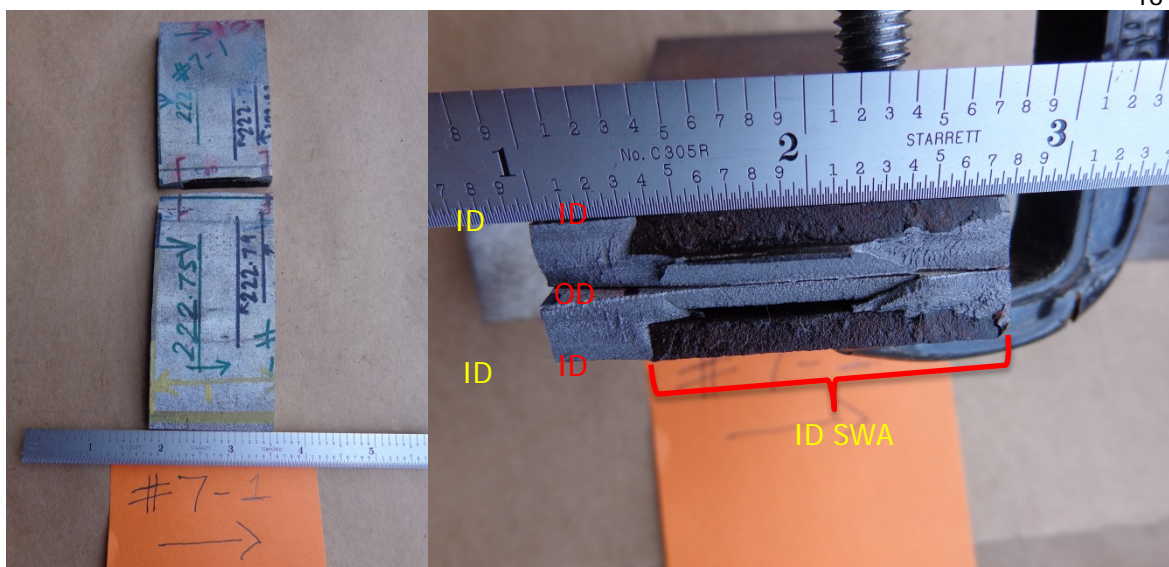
SWA #7-1, Break location and fracture surface
